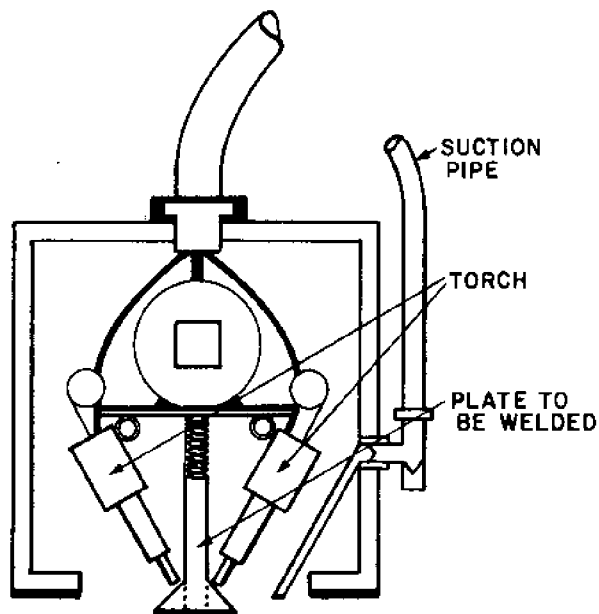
Conceptual design of automatic underwater welding machine developed by Lombardi.^{3,18}
